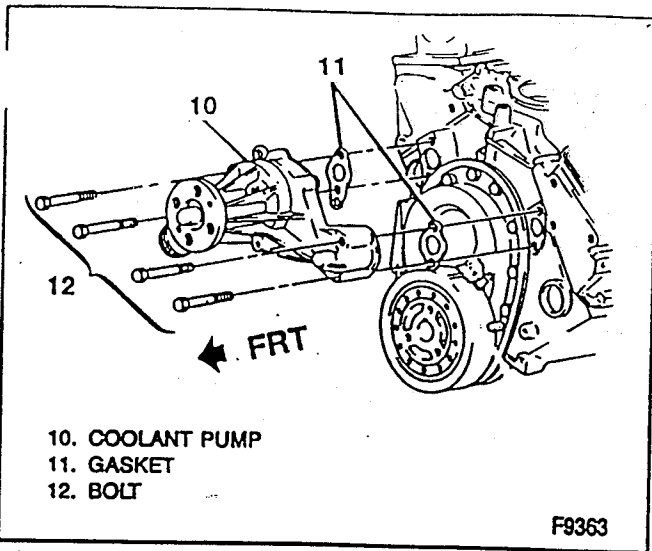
Coolant Pump (5.0L and 5.7L Engines)
